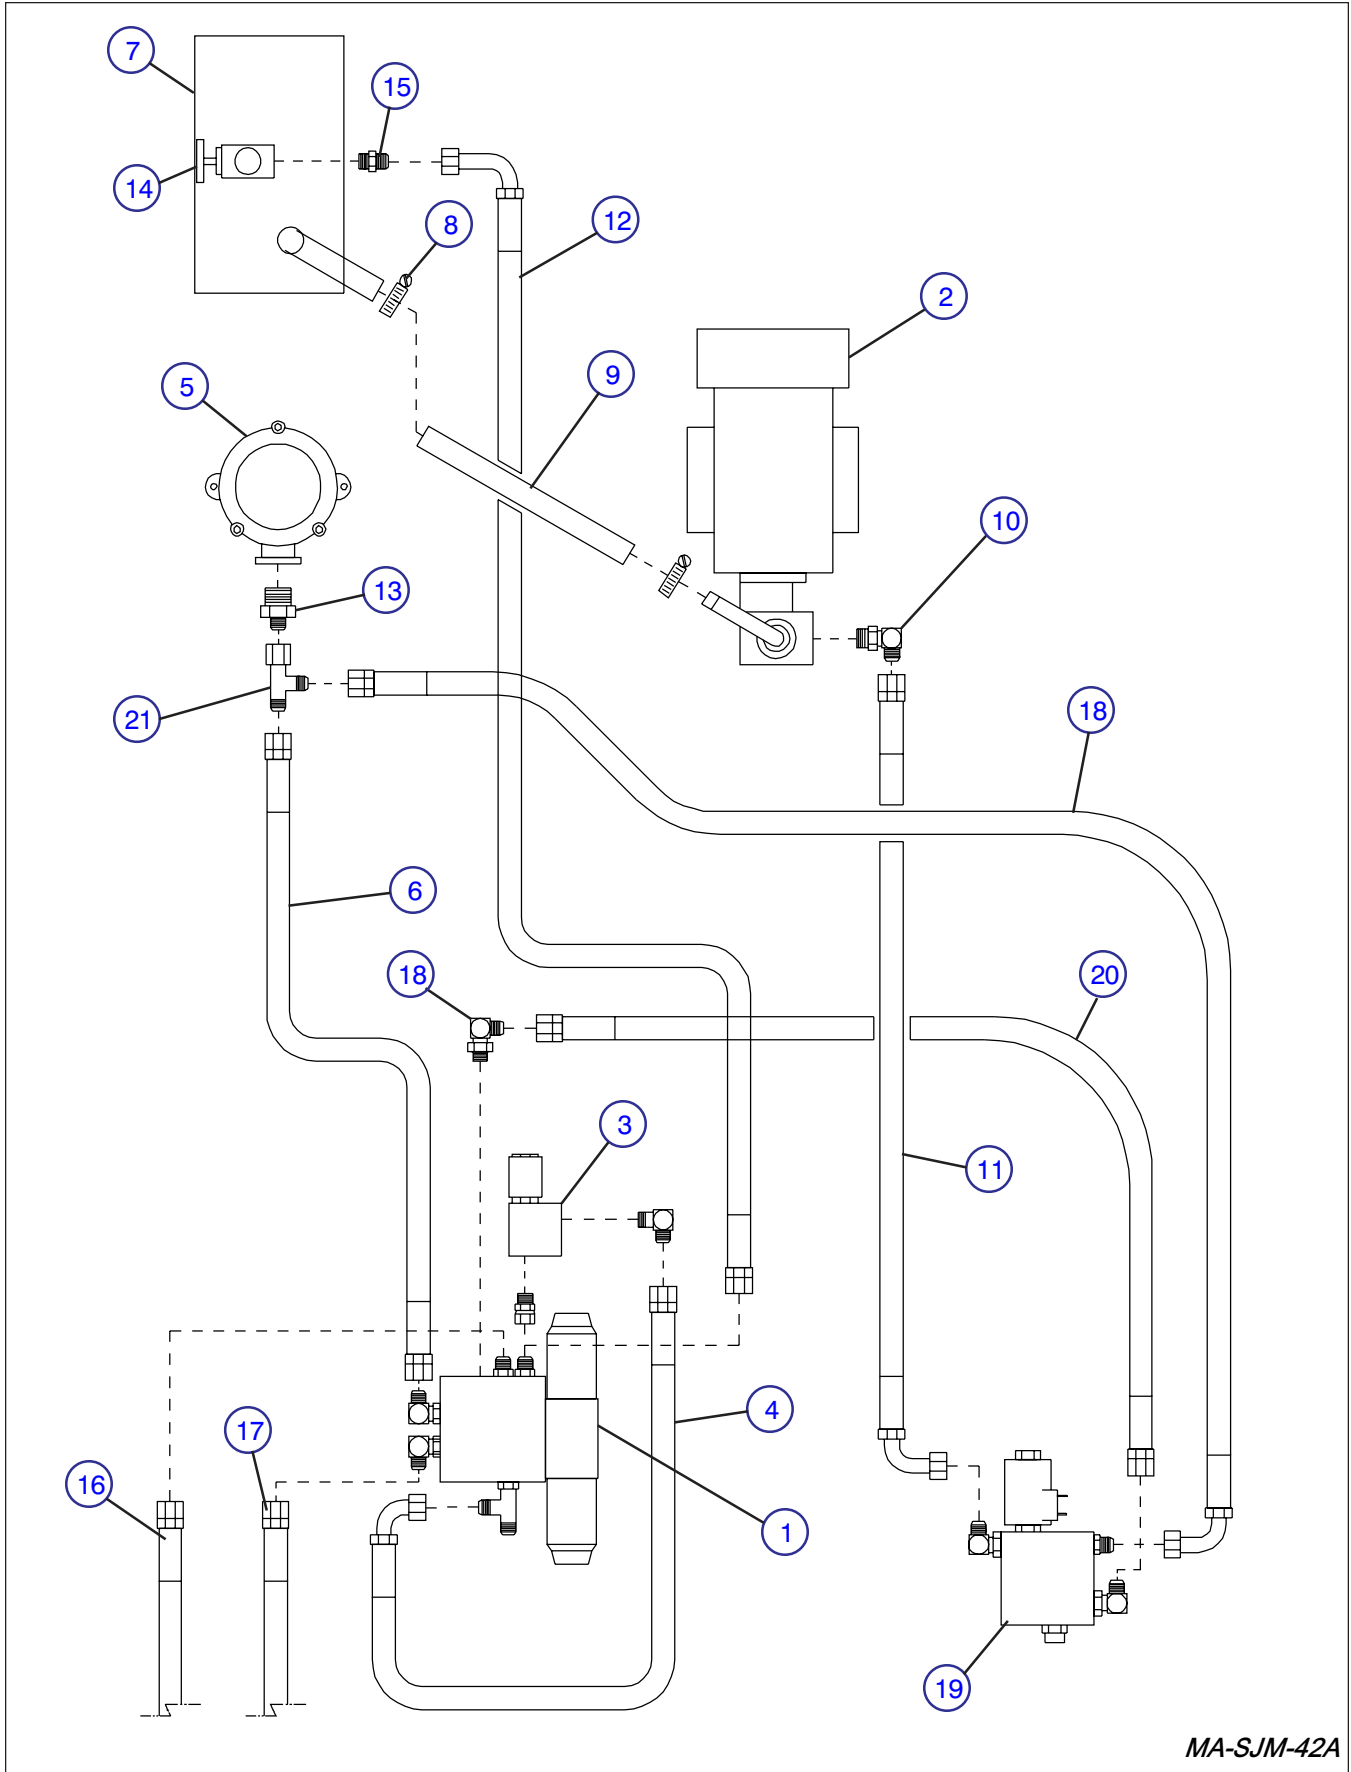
HYDRAULIC/ELECTRIC TRAY ASSEMBLY - 2-Speed Drive
